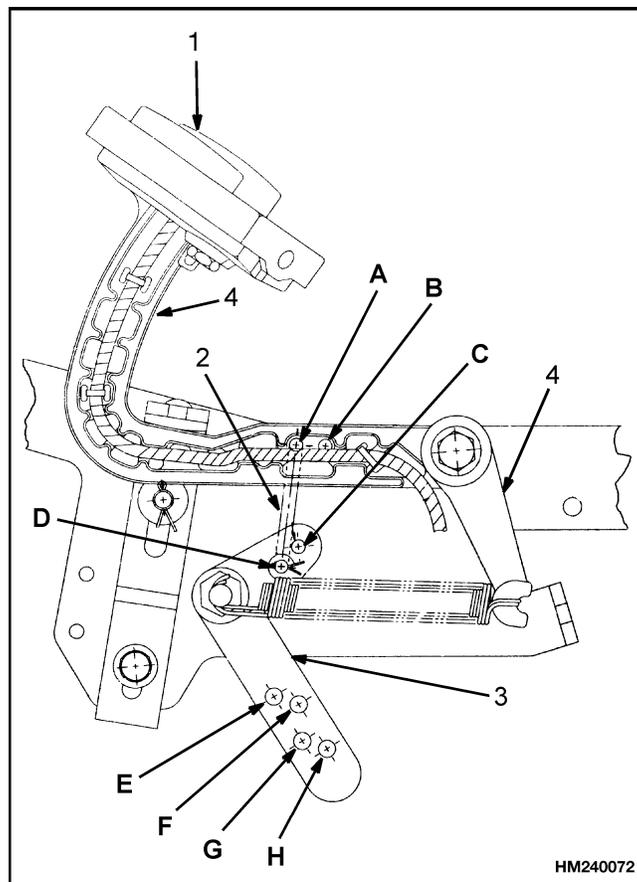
MONOTROL Pedal H2.00-3.20XM (H40-65XM)
